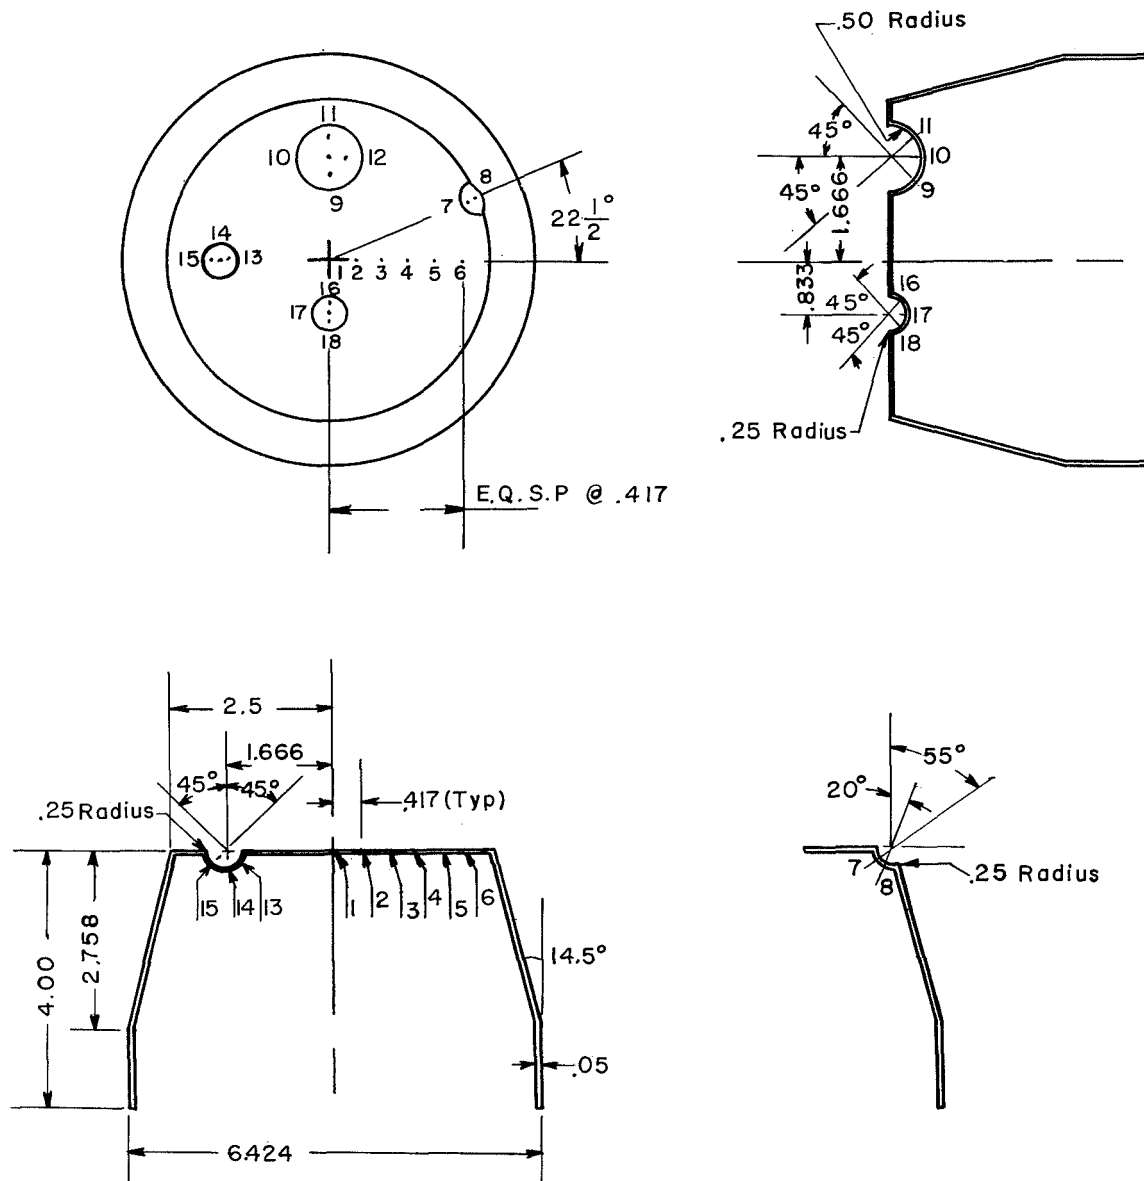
Thermocouple layout of model. All dimensions are in inches.
